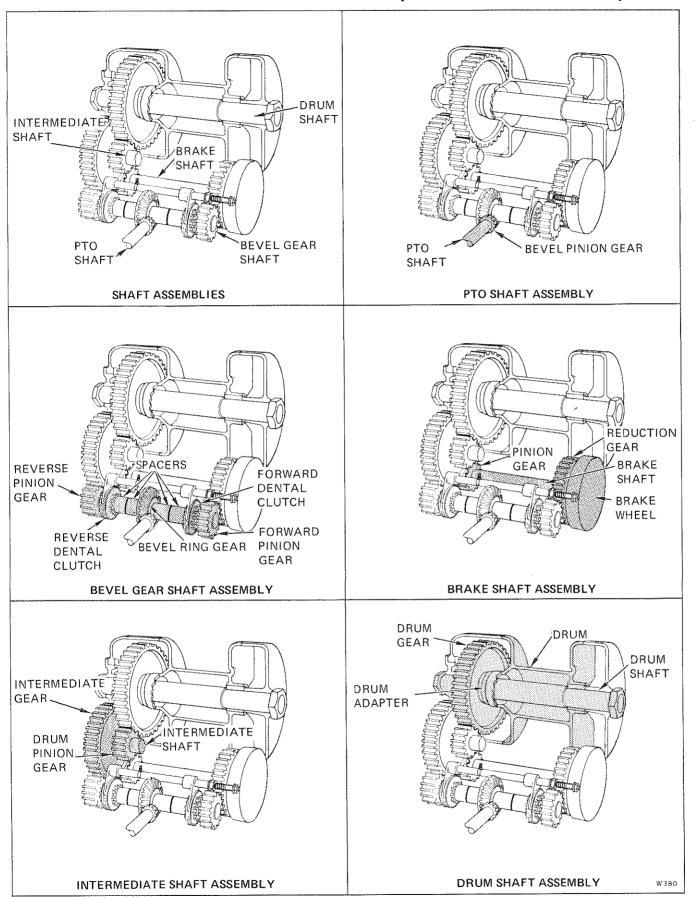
DIRECT DRIVE GEAR TRAIN
